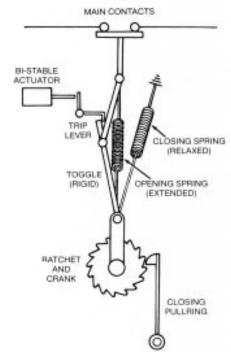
Schematic diagram of actuator mechanism with contacts closed.
